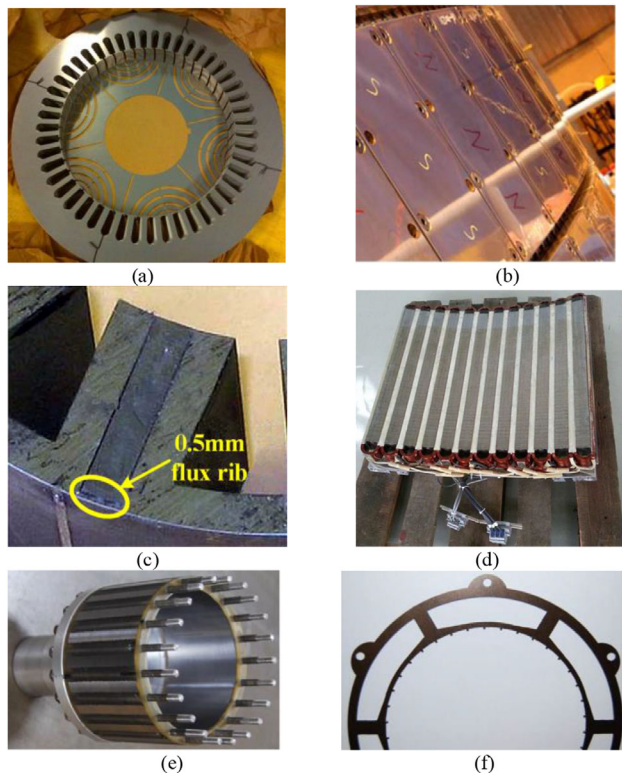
Manufacturing parts. (a) Doubly fed reluctance machine laminations for assembly [119]. (b) PM module in a large surface-mounted PMSM [121]. (c) A flux bridge connecting stator segments for a FSPM machine [122]. (d) One stator segment of an FSPM machine [123]. (e) Cup-shaped rotor for a magnetic-gear PM machine [54]. (f) Closed-slot stator for a magnetic-gear PM machine with PM fixed on stator surface [54]
